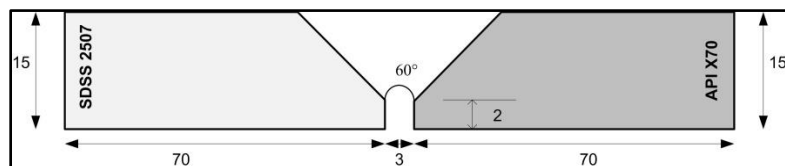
Weld joint design (all dimensions in mm)
